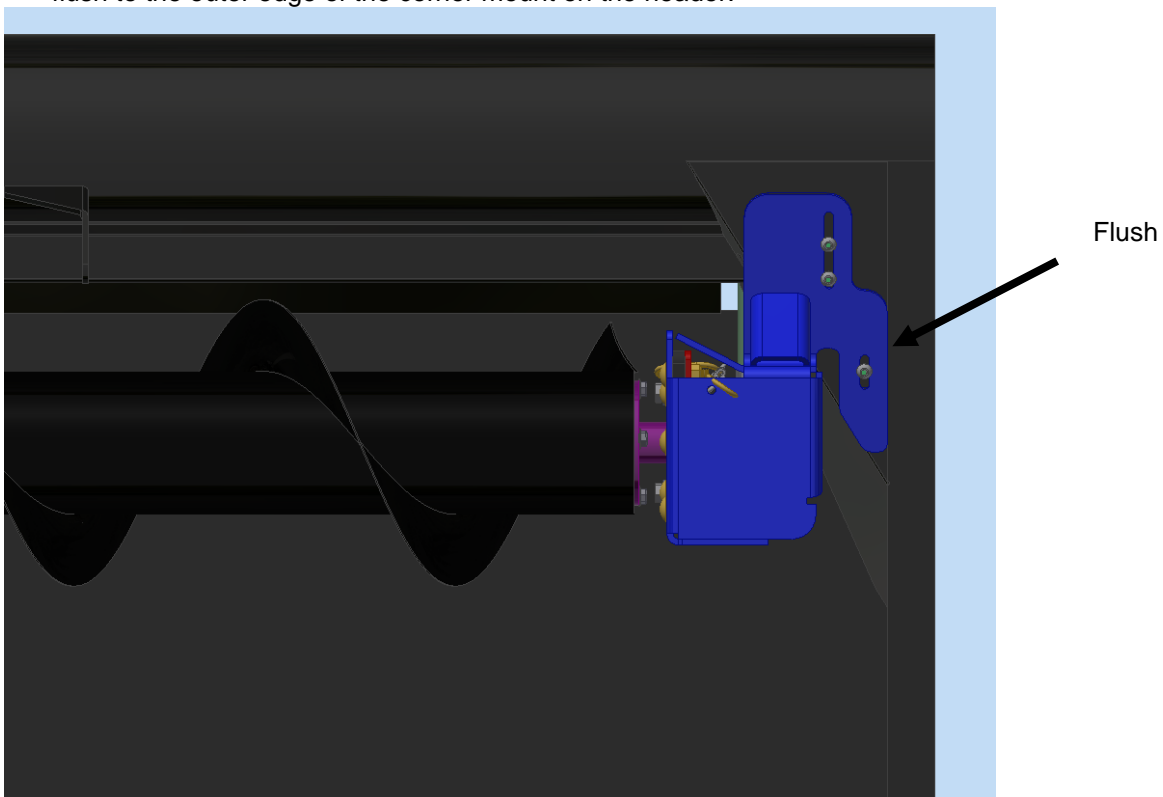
TOP VIEW OF LEFT END MOUNT
